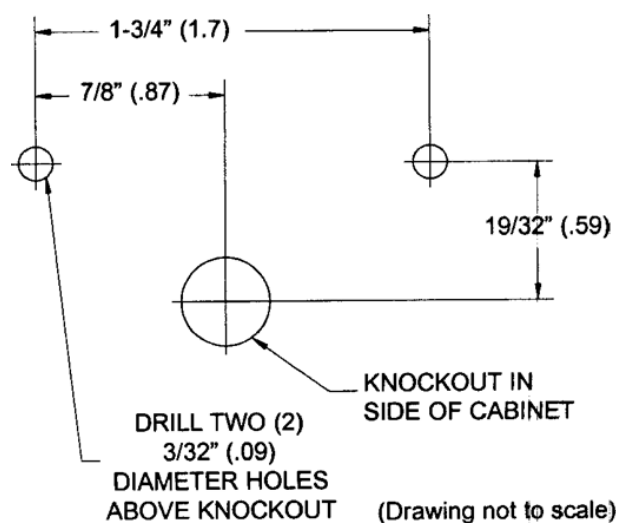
CABINET-MOUNTED CLEARANCE
